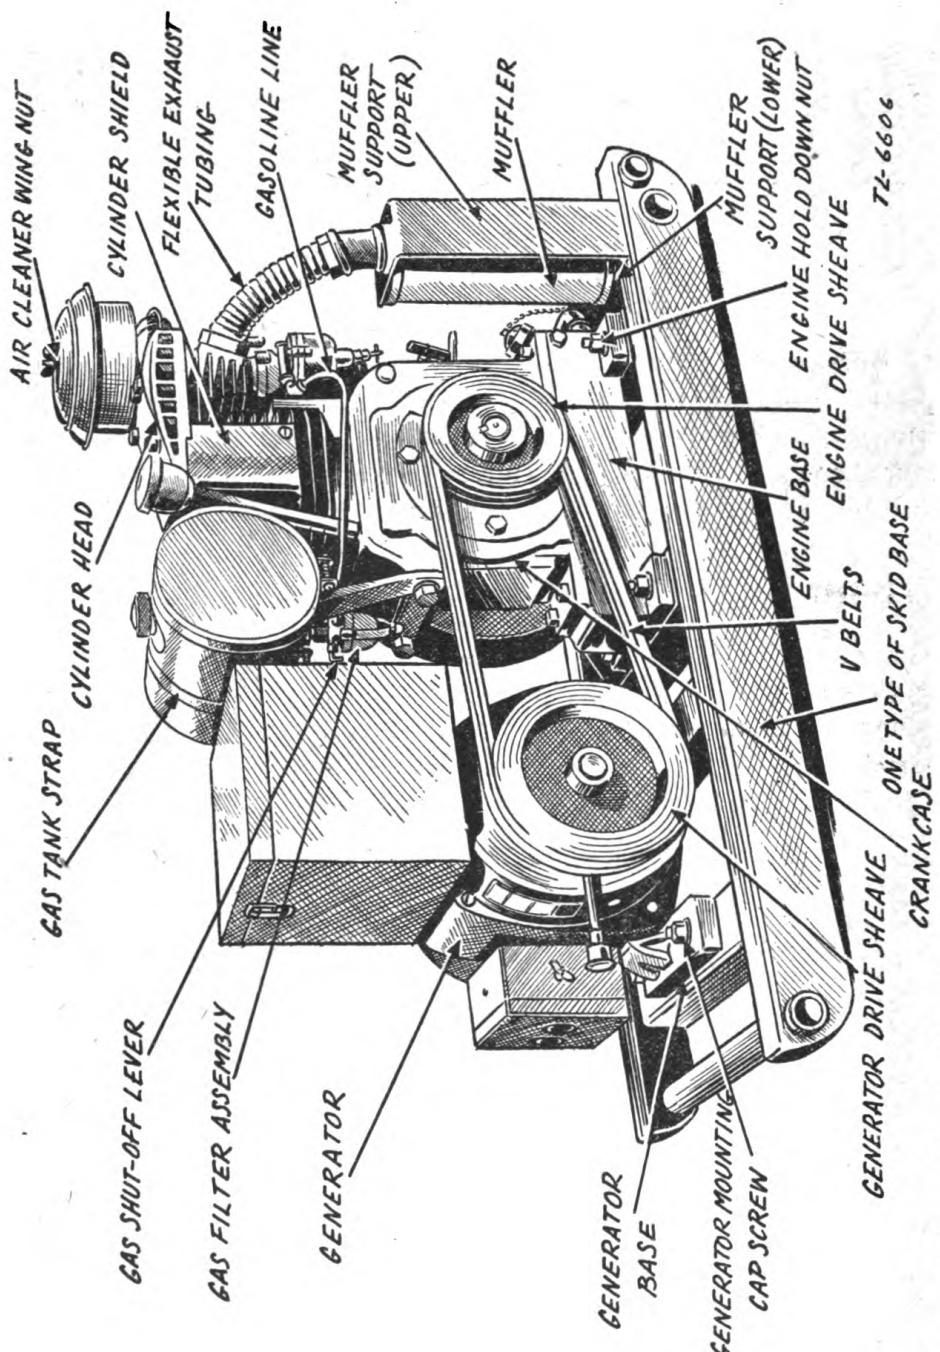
Power Unit PE-75-(*), drive side with belt guard removed, showing one type of muffler mounting and one type of skid base.
